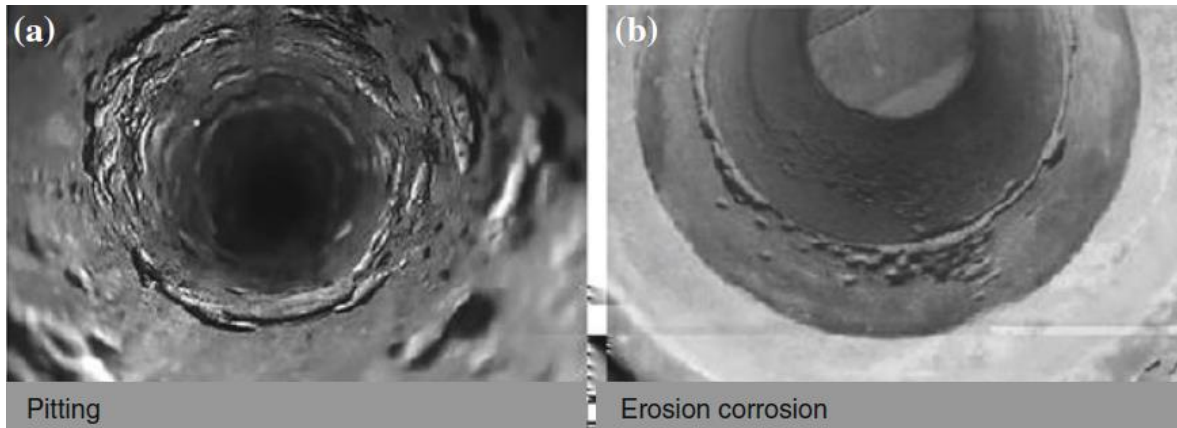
Pitting and erosion-corrosion mechanisms (Otegui 2014, 93).
